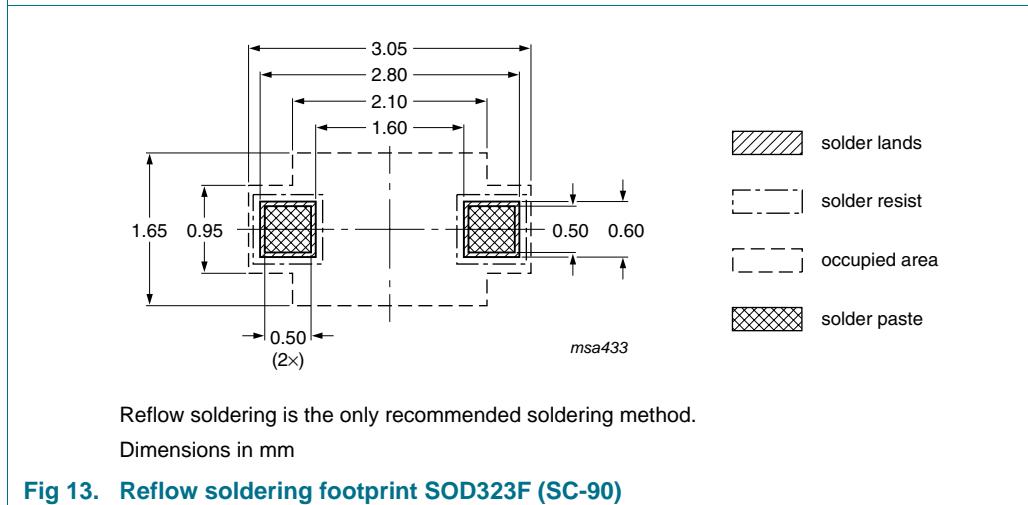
Reflow soldering footprint SOD323F (SC-90)
